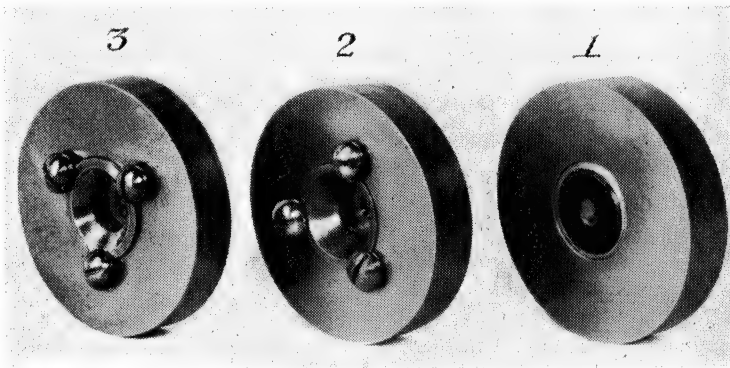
Models showing Complete Jewel-hole Settings viewed inside and outside, with and without Endstones.
